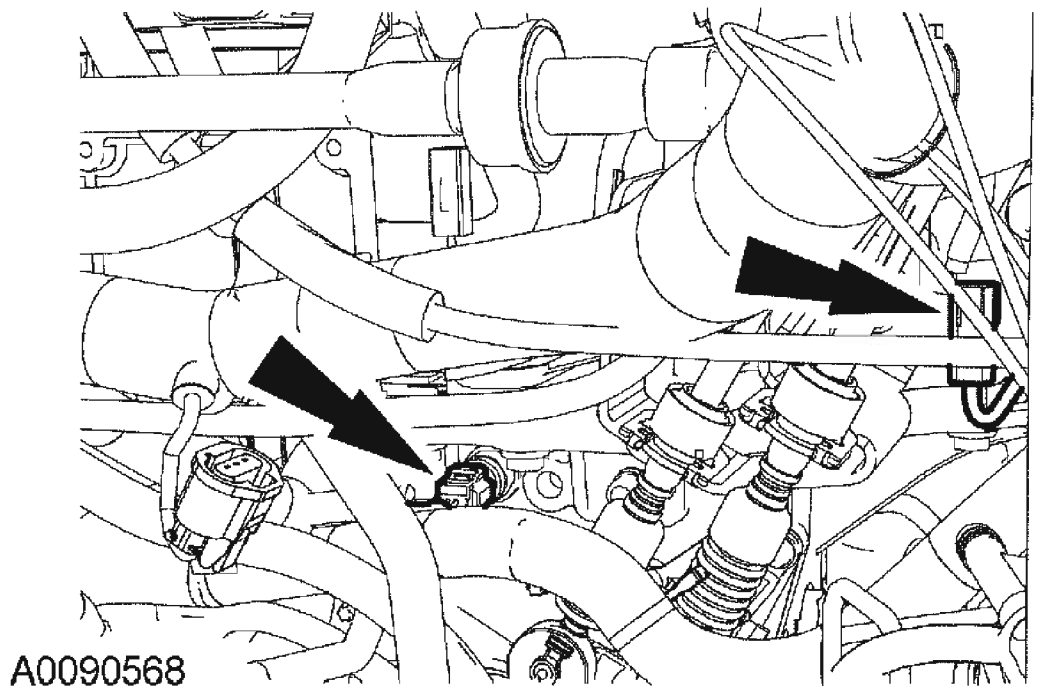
Installing Clutch Hydraulic Line Bracket-To-Transaxle Bolt
